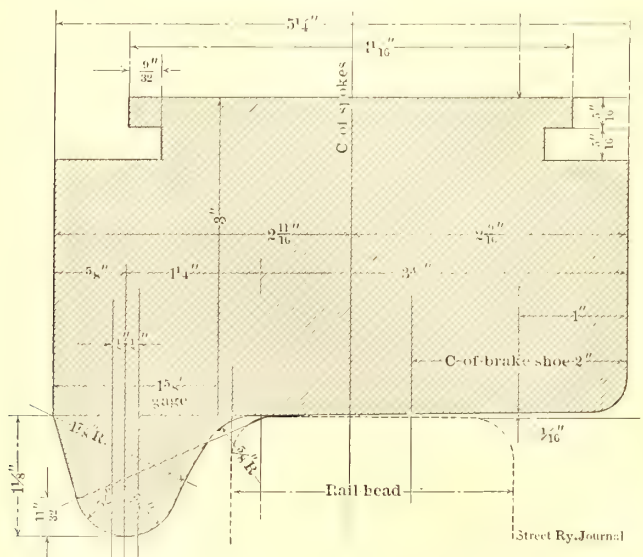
SECTION OF MOTOR WHEEL STEEL TIRE
